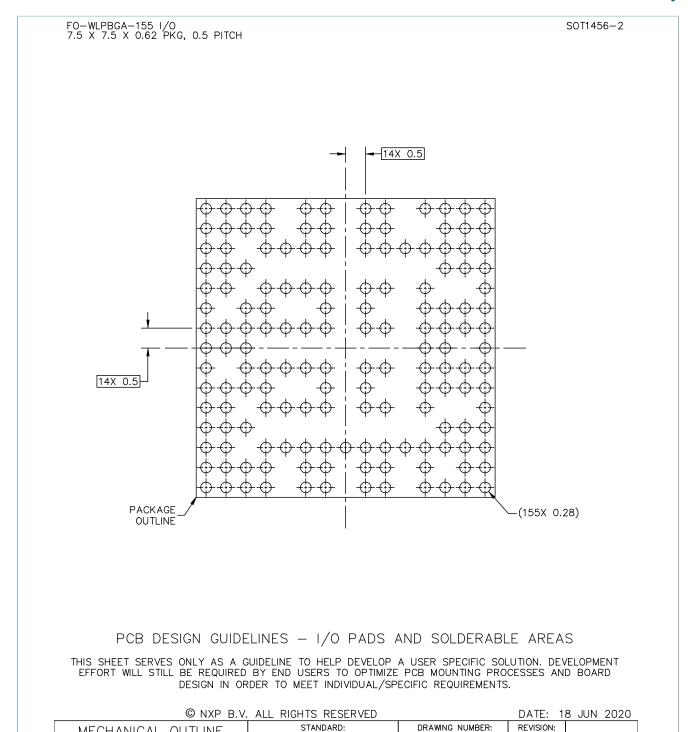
Reflow soldering footprint part2 for WFBGA155 (SOT1456-2)
